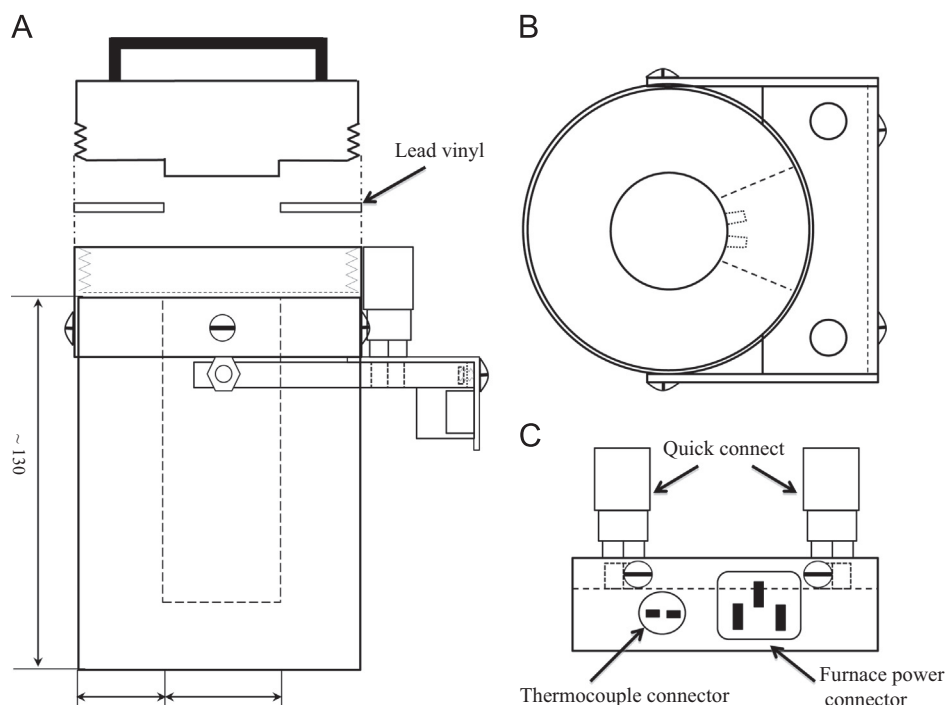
Drawings of side (A) and top (B) views of lead pig assembly. (C) Front view of bracket assembly only. Dimensions are reported in mm.
